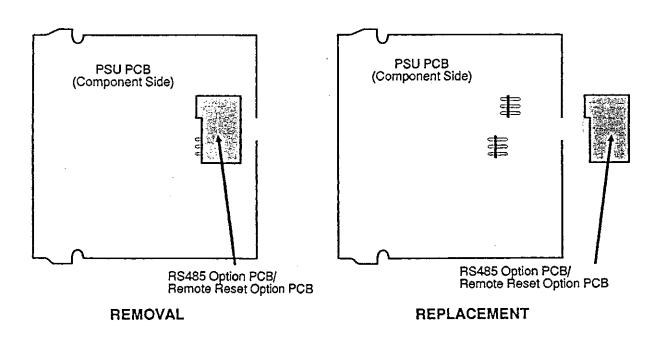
Removing/Replacing the RS485 Option PCB or Remote Reset Option PCB
